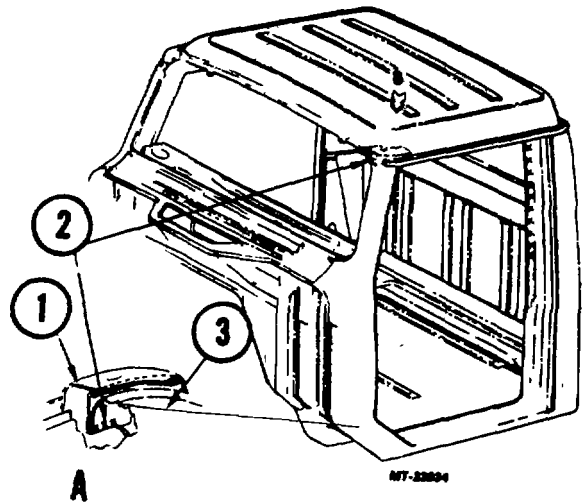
Side Panel to Roof Outer and Inner Panel Spot Welds (Outer Roof Panel not Shown)
